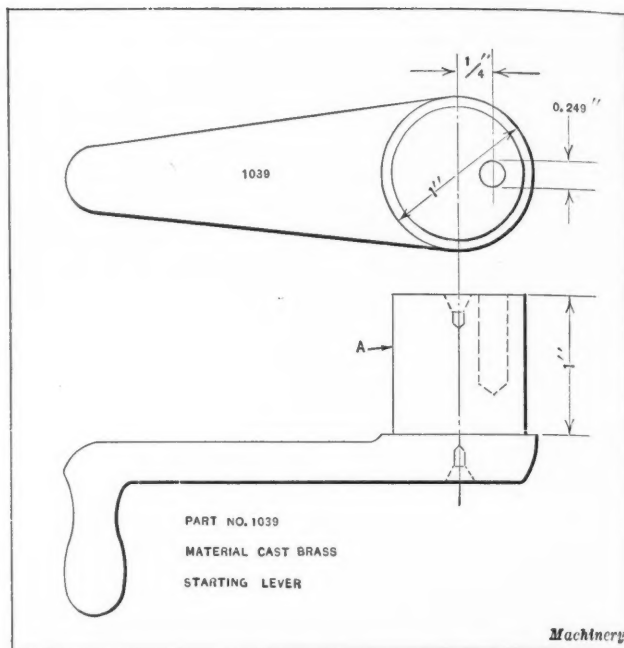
Detail Drawing of Starting Lever for which Drill Jig is to be made
